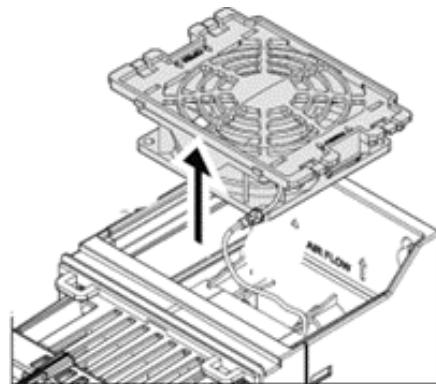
Main Fan Removal (Frame Sizes R1 up to R3)
